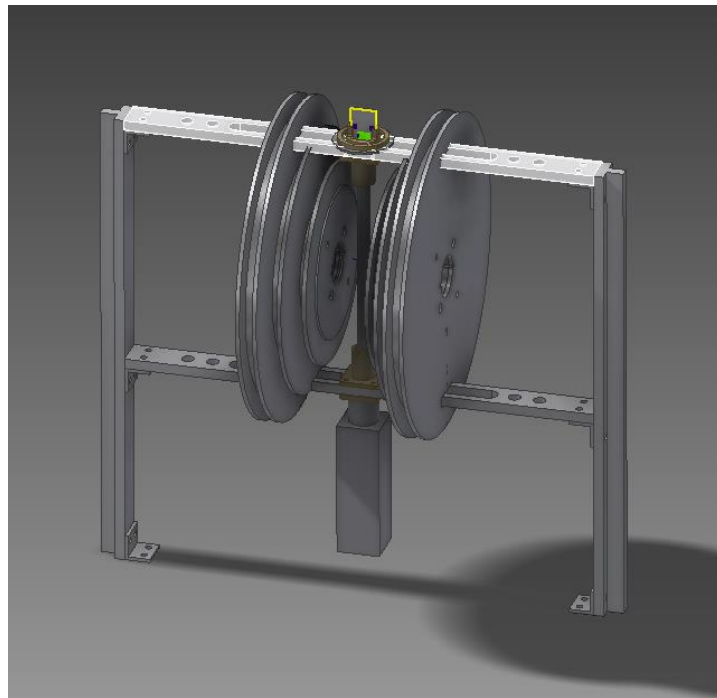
Magnet CAD Model Assembly with Cold Finger and T
